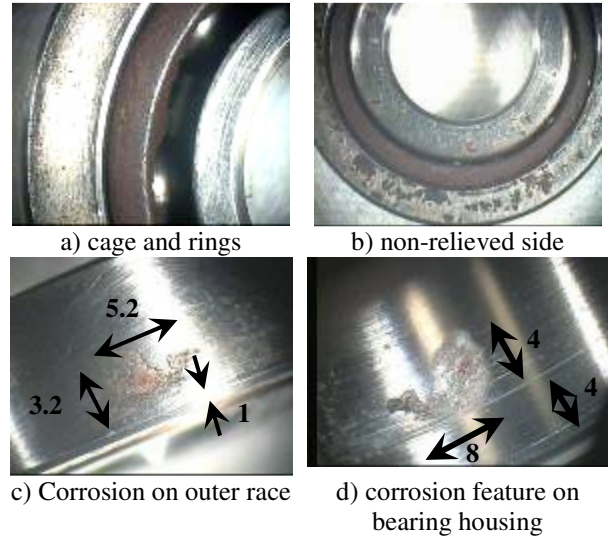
Images of the right hand bearing and housing. Dimensions in mm
